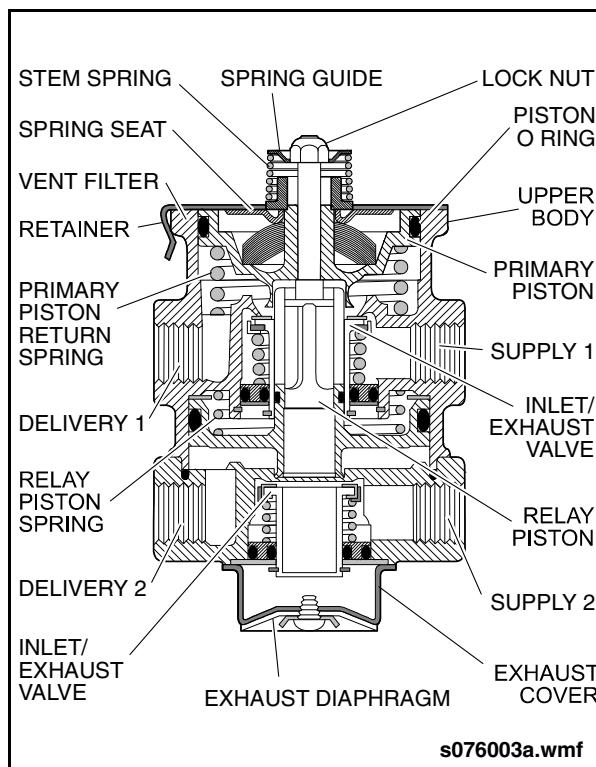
E-6 Dual Brake Valve Cross Section
